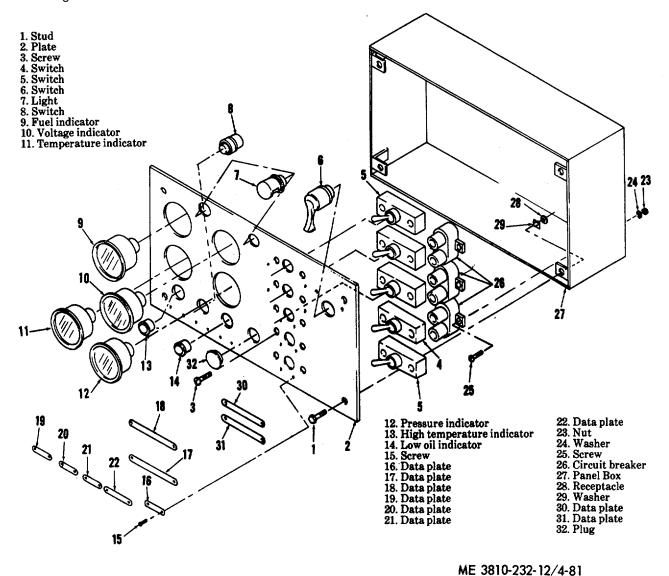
Crane instrument panel, disassembly and reassembly.
